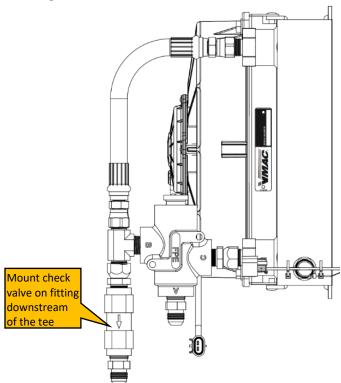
Thermostatic Valve on Air to Oil Cooler with Check Valve
